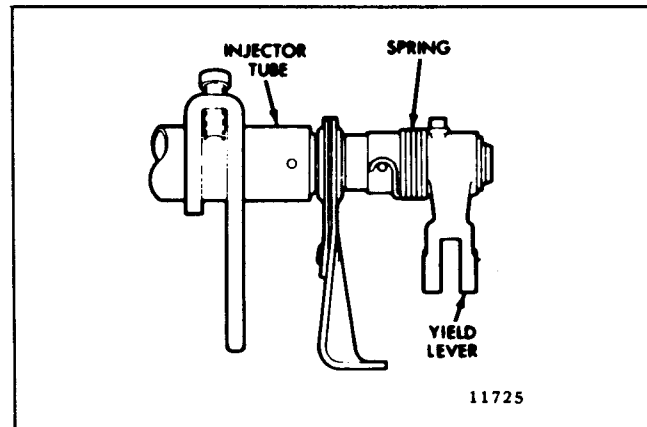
Throttle Delay Yield Lever (In-Line Engine)
